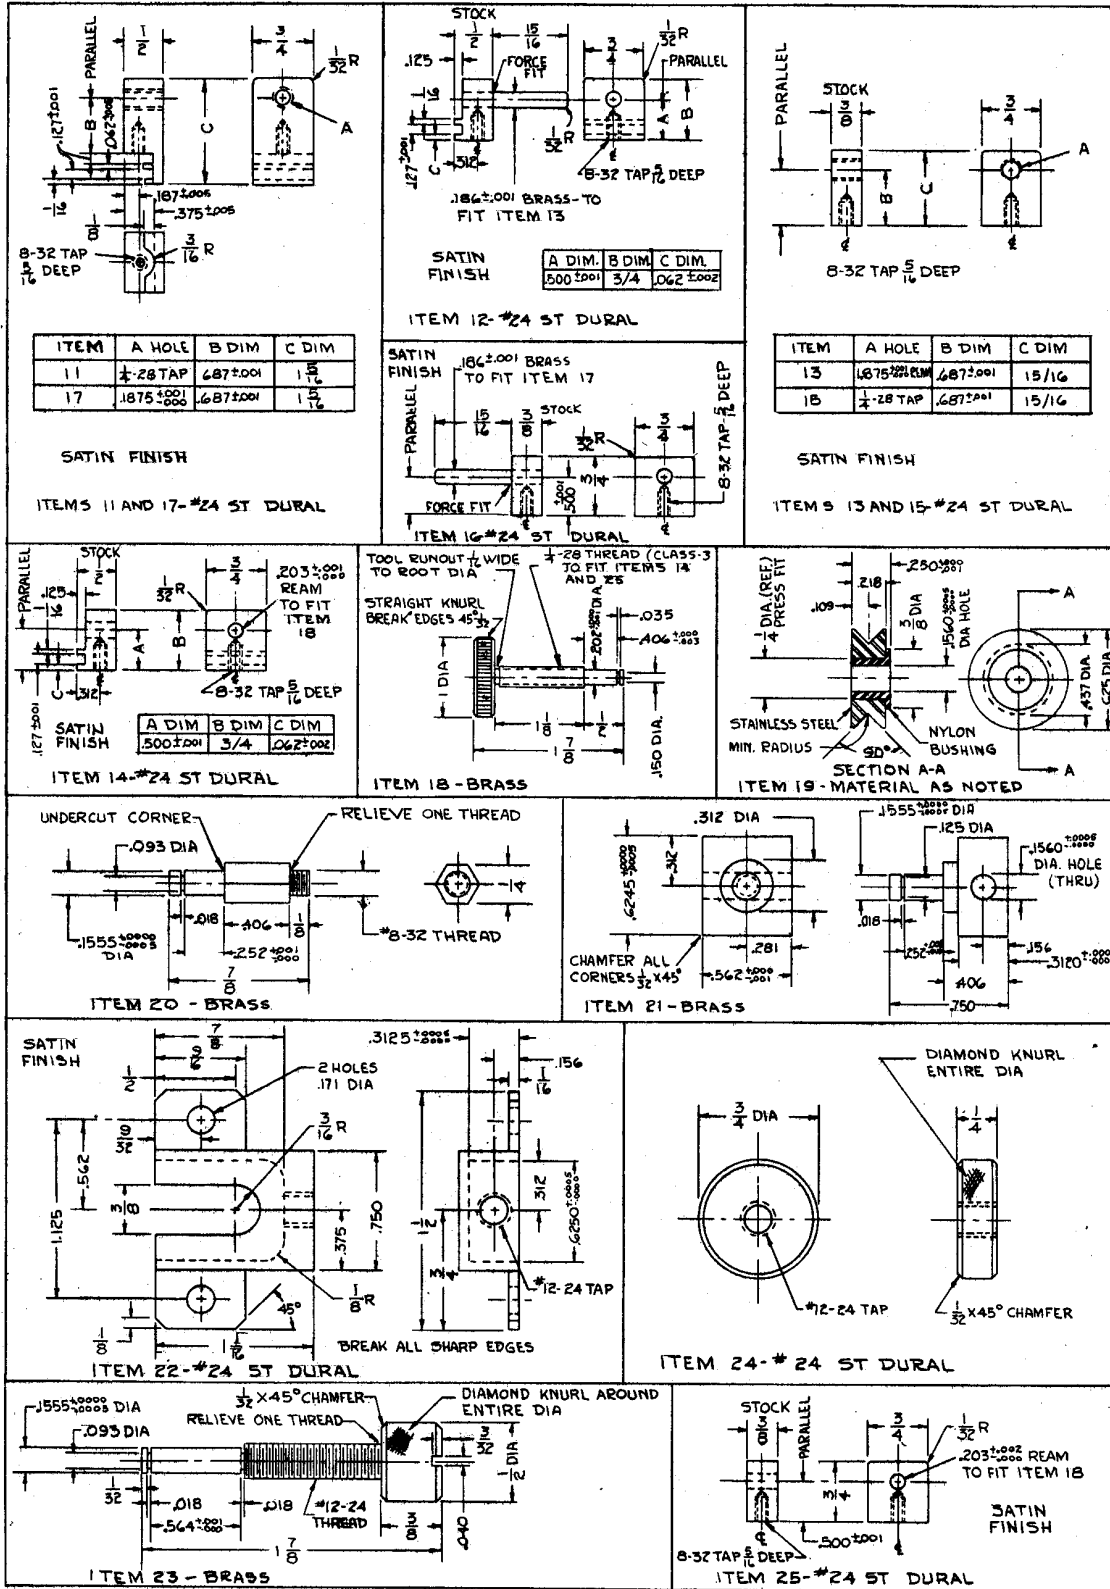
Items 11 through 25 of Yoke Mounting Assembly
